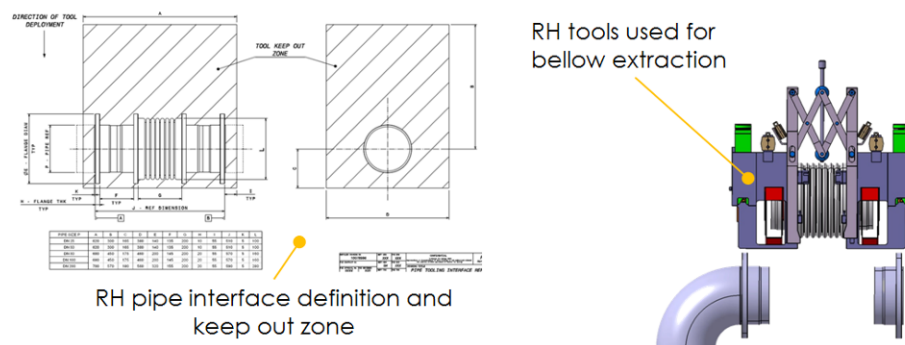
Pipe cut and weld interface and tools for BLCs
